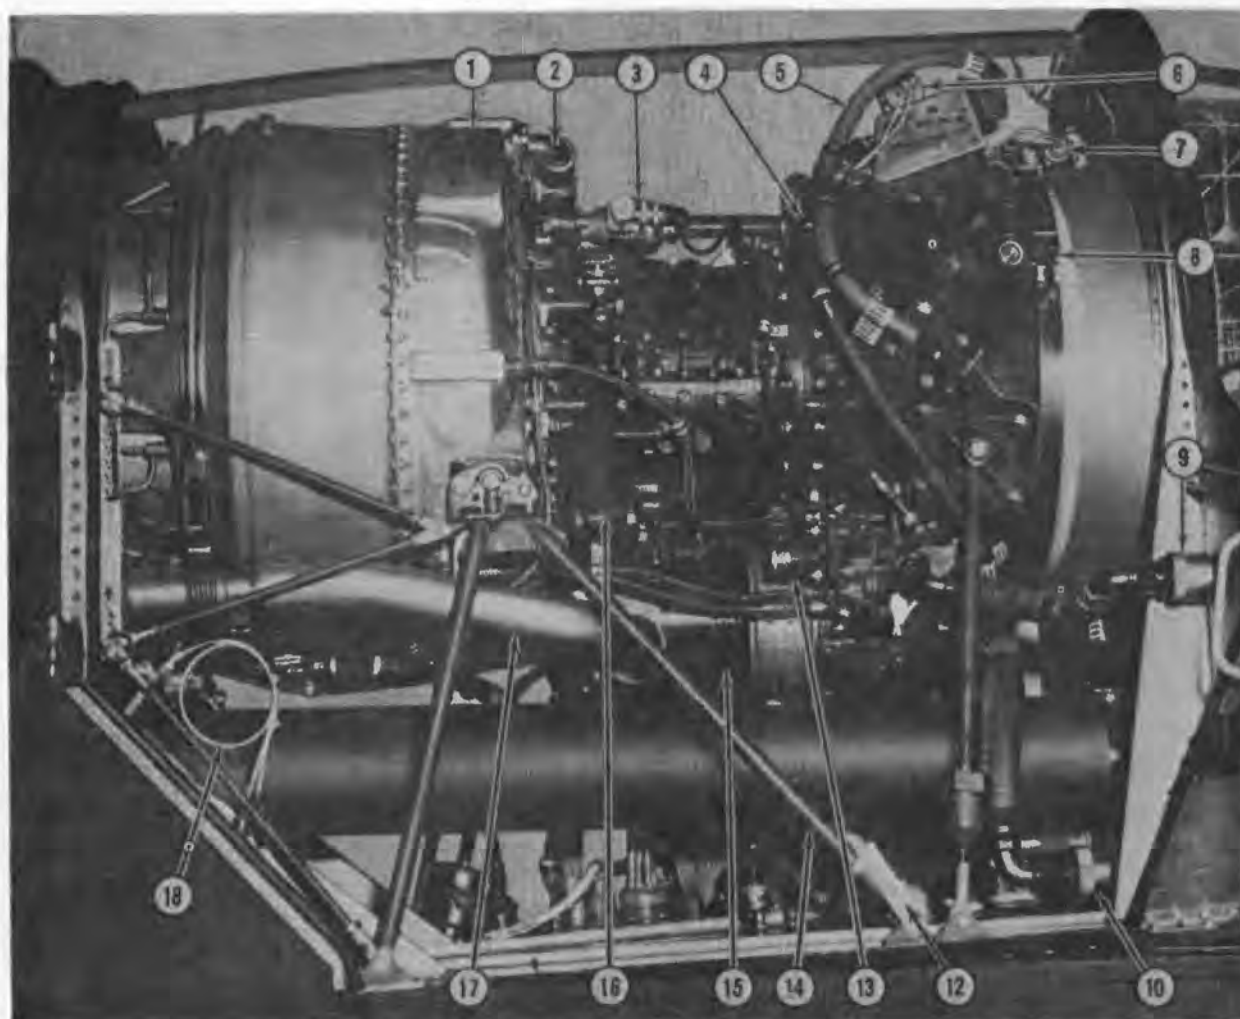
UH-1A Power plant installation — RH side (typical) (Sheet 2 of 2)
